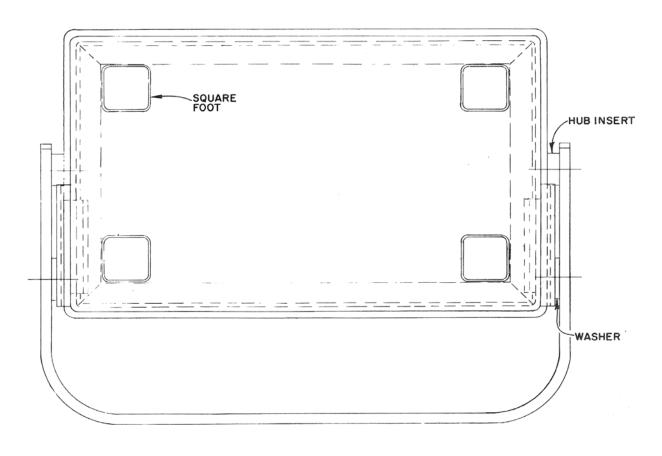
Complete cabinet assembly (P/N 4182-2328)
